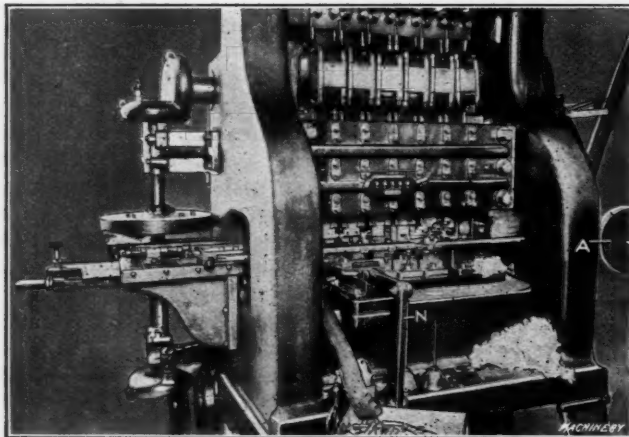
The Cartridge Clip Machine—A Special Machine that completes the Body of the Clip in Six Distinct Operations
